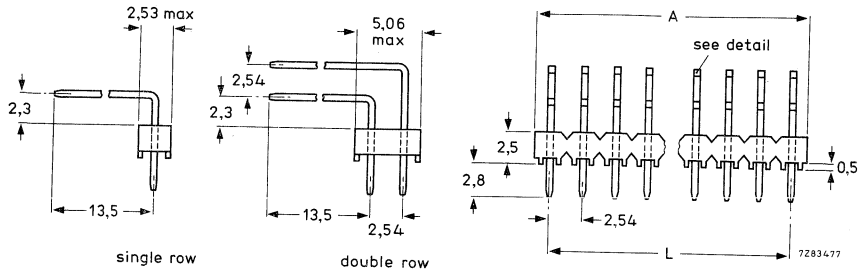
Male header with 90° angled pins; see Table 5 for dimensions A and L.
